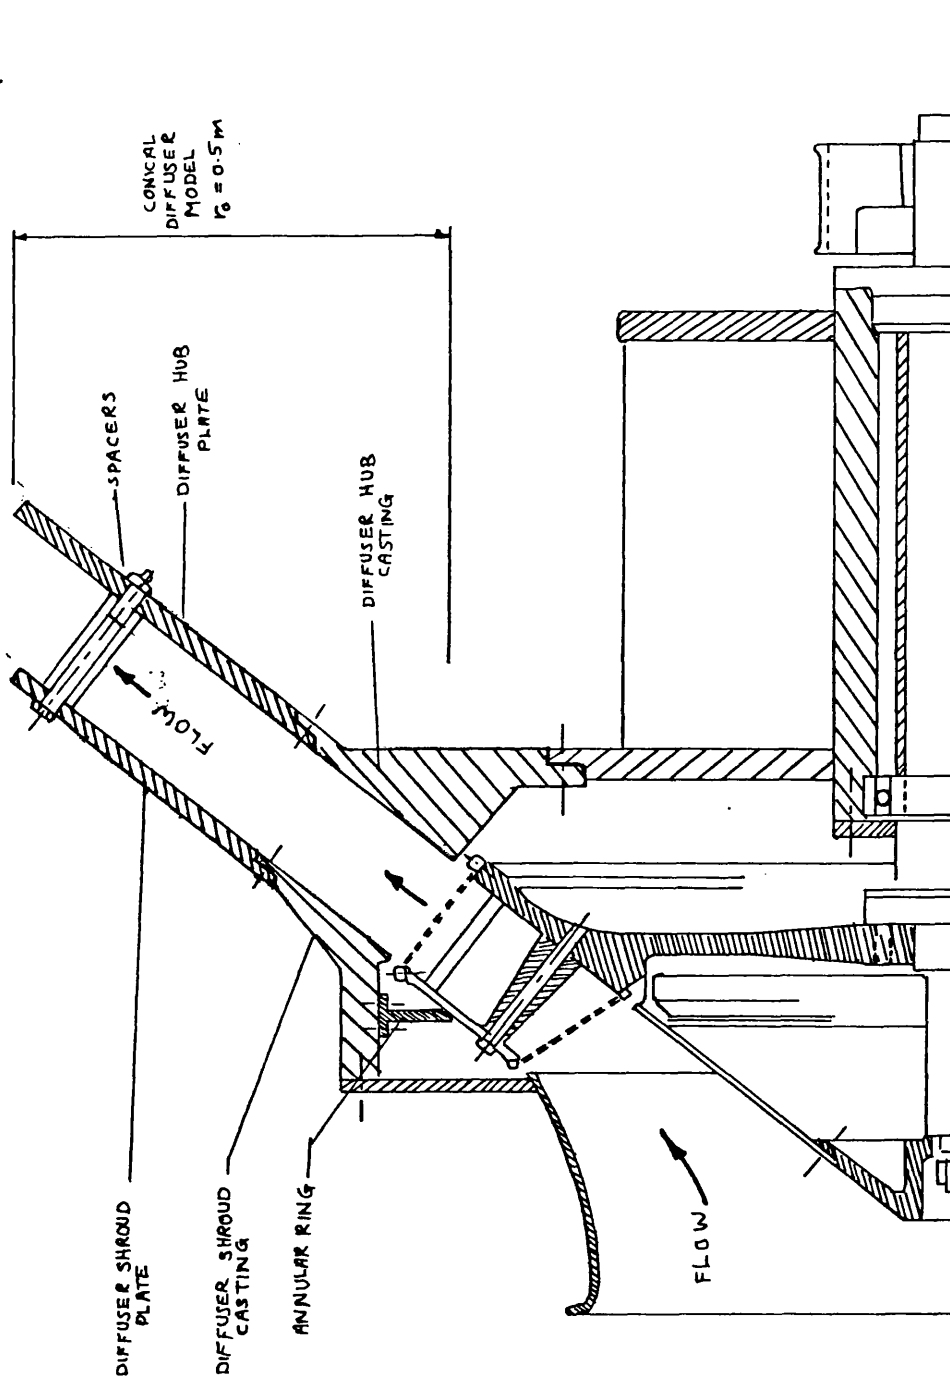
ROTATING ASSEMBLY AND CONICAL DIFFUSER MODEL
